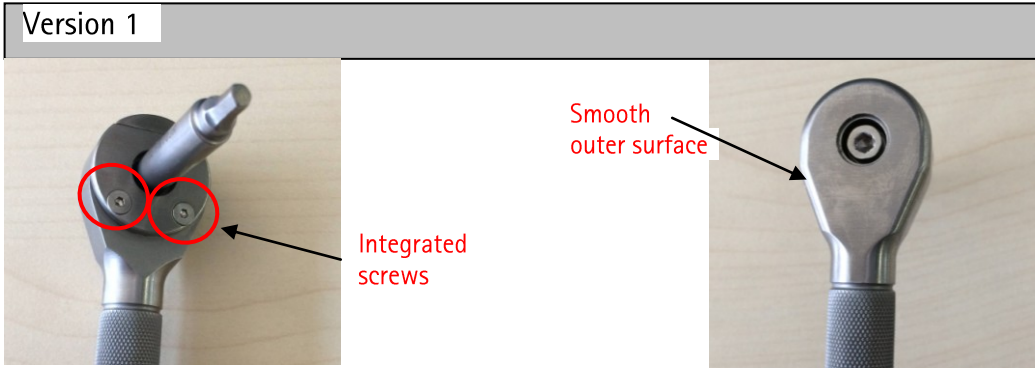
(left): Inner surface of the torque wrench with hexagon bit inserted.
